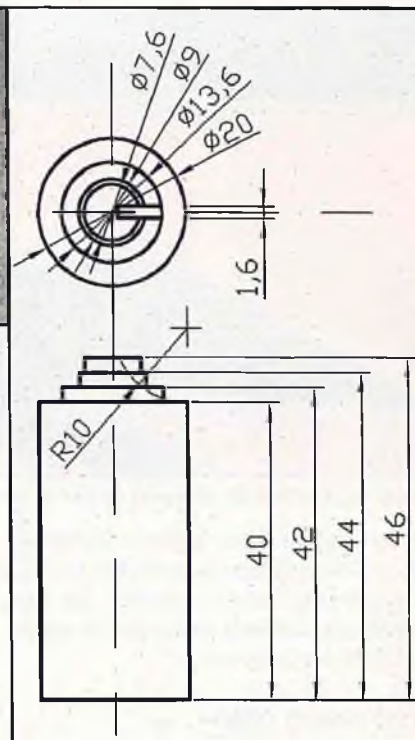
Our homemade tool for putting the balls of an accidentally dismantled bearing back into place. Tolerances are not critical, and almost any length will work. It was turned from a piece of aluminium stock, with the slot for introducing the balls cut with a Dremel wheel (dimensions in mm).
